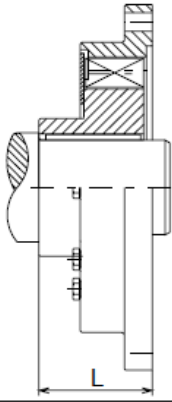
Inpro-Seal Illustration.<sup>Ref 7</sup>
